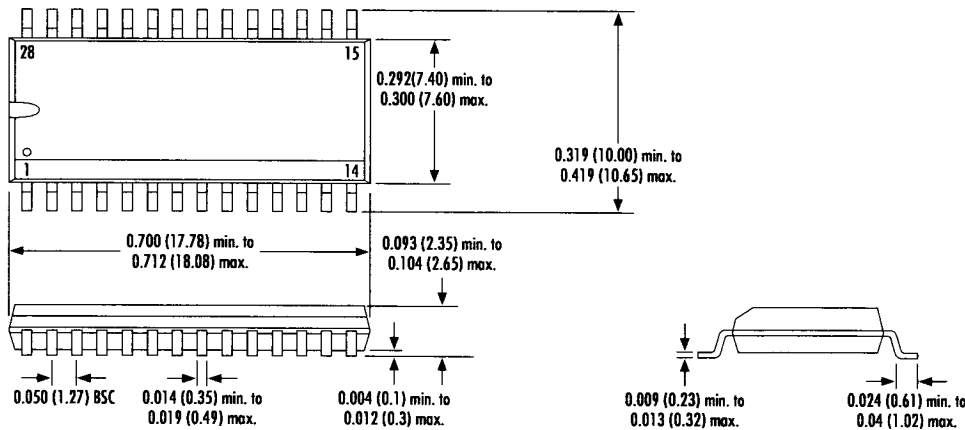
Q2510I-100N - 28-pin SOIC Package Outline [Dimensions are in Inches (mm)]
